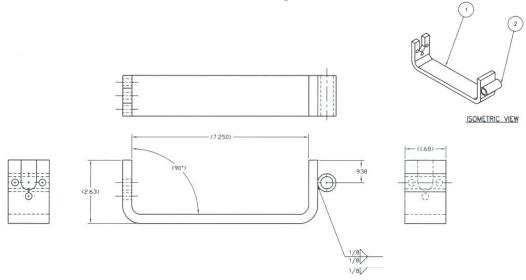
723 Series Actuator with Mounting Bracket (dimensions in inches)
